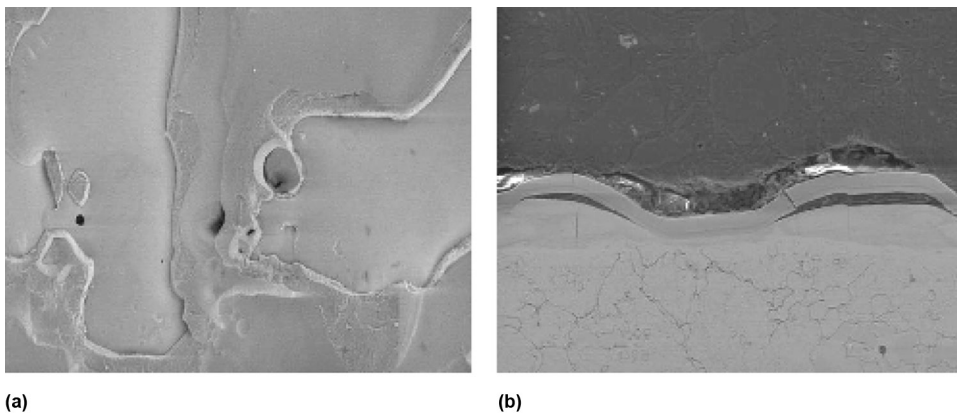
Flaking of physical vapor deposition coating on a D2 tool steel, due to residual stresses caused by surface features. Source: Ref 16.6
